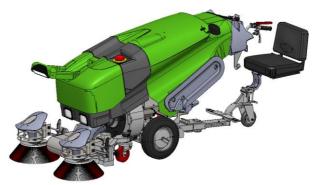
3D assembly model in SolidWorks of a novel design of electric vacuum sweeper
